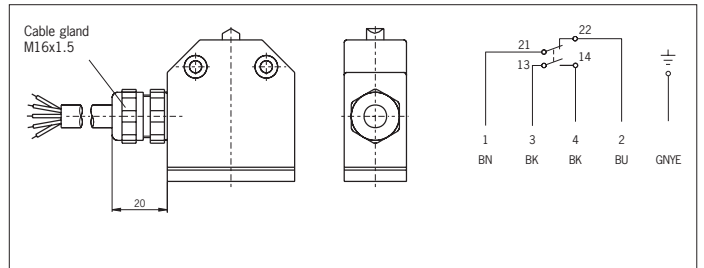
Dimension drawing/connection diagram SN01.558X... with connection cable (PUR cable, 5x0.5 mm²)
